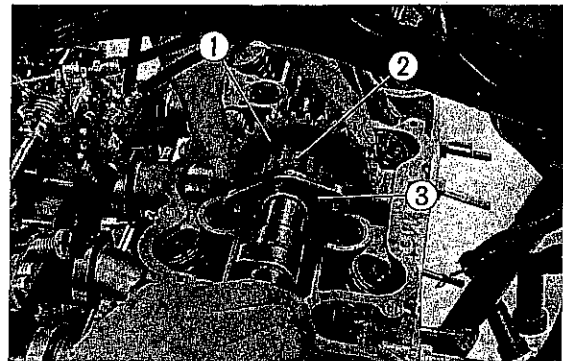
① Cam sprocket ② Cam chain ③ Camshaft
